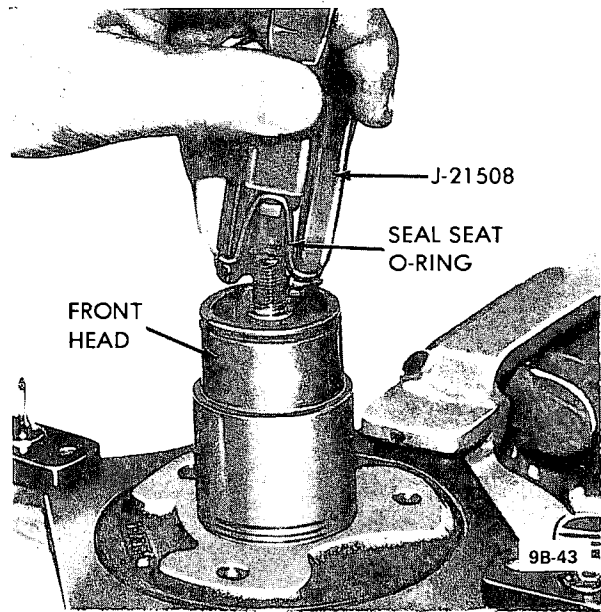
B-66 Installing Seal Seat O Ring - 6 Cylinder Compressor
